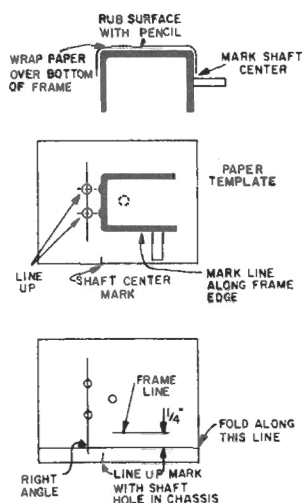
Making a drilling template for the tuning capacitor for mounting the capacitor under the top side of the chassis. (A) Paper should be drawn taut over frame, with the front edge touching the shaft. Make a mark at this edge indicating the center of the shaft. Holding the paper securely in the same position, rub entire top surface lightly with a pencil to obtain the mounting-hole pattern. (B) Draw a line through the in-line holes in the pattern. Lay the capacitor on its side, line up the capacitor mounting holes and the in-line pattern holes, and draw a line along the front edge of the frame. (C) At a point $\frac{1}{4}$ inch closer to the front of the pattern, draw a line at exact right angles to the mounting-hole line. Fold the paper accurately along this line. Place the fold over the front edge of the chassis, with the shaft center line on the pattern lining up with the shaft-hole center in the chassis front. Tape the template to the chassis, and punch-mark all three mounting holes. Mounting holes should be drilled out to No. 28 drill size, and shaft hole to $\frac{3}{16}$ inch.
